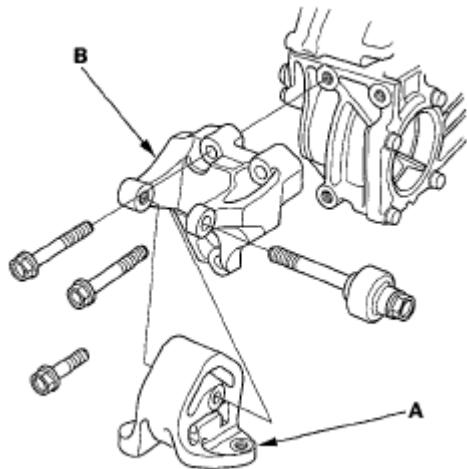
Identifying Rear Transmission Mount And Rear Transmission Mount Bracket (2WD)
